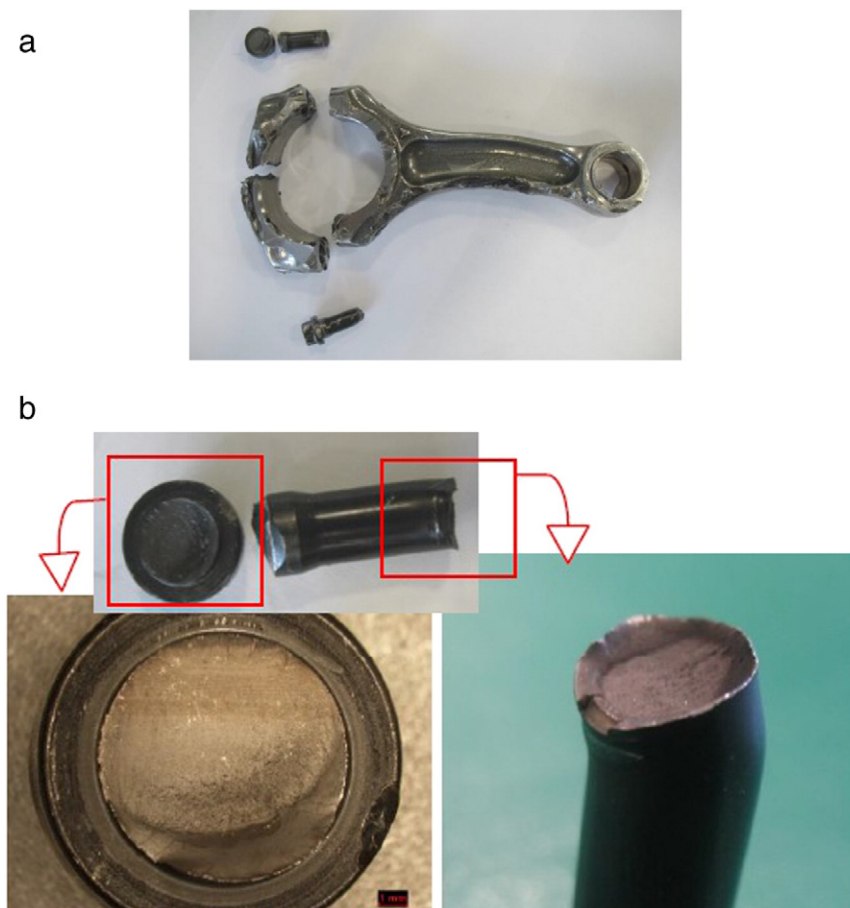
Fatigue crack in the bolt: (a) global view; (b) bolt detail.
